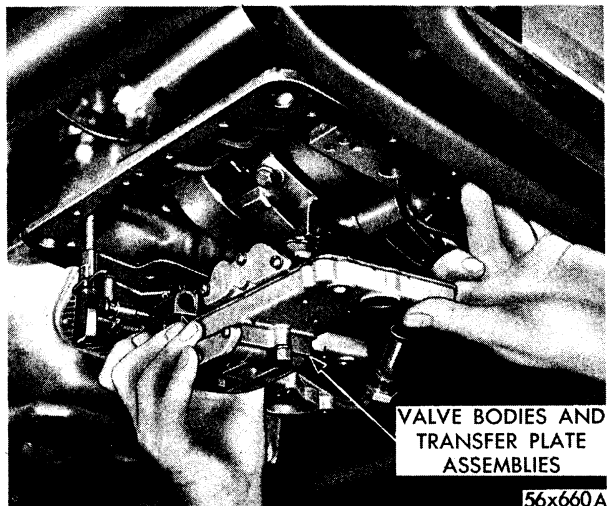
Removal and Installation of Valve Bodies and Transfer Plate Assembly
